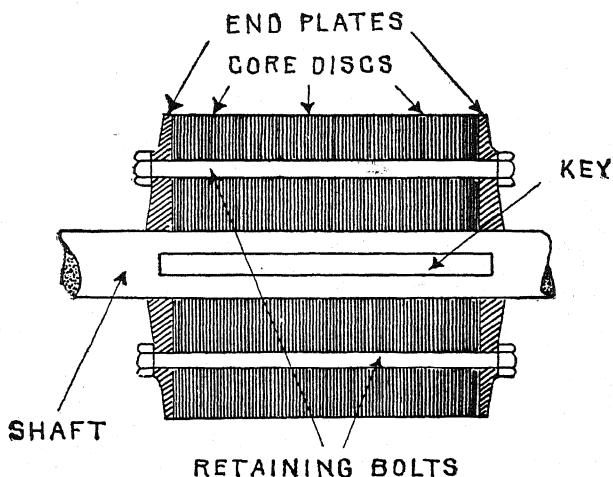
Laminated armature core with through retaining bolts. In the larger sizes, these bolts are used instead of nuts threaded on the shaft on account of the large size of the latter.
